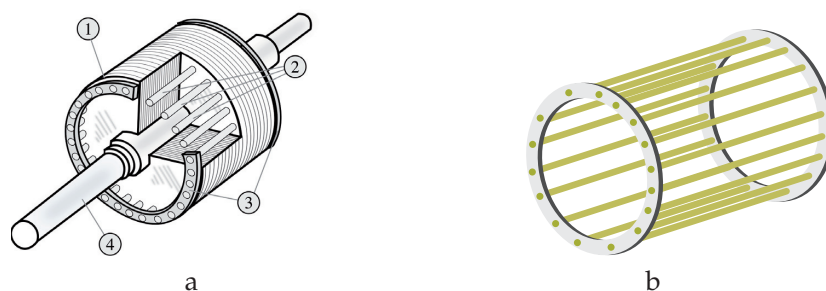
a - Squirrel-cage rotor: 1 – rotor core, 2 – bars, 3 – end rings, 4 – shaft; b - winding of squirrel-cage rotor
